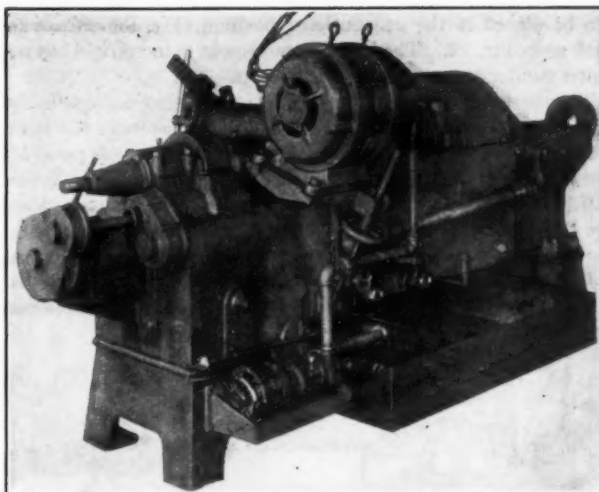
MACHINE USING SPINDLE SHOWN IN FIG. 10 PRODUCING 100 TWO-INCH NUT BLANKS PER HOUR
